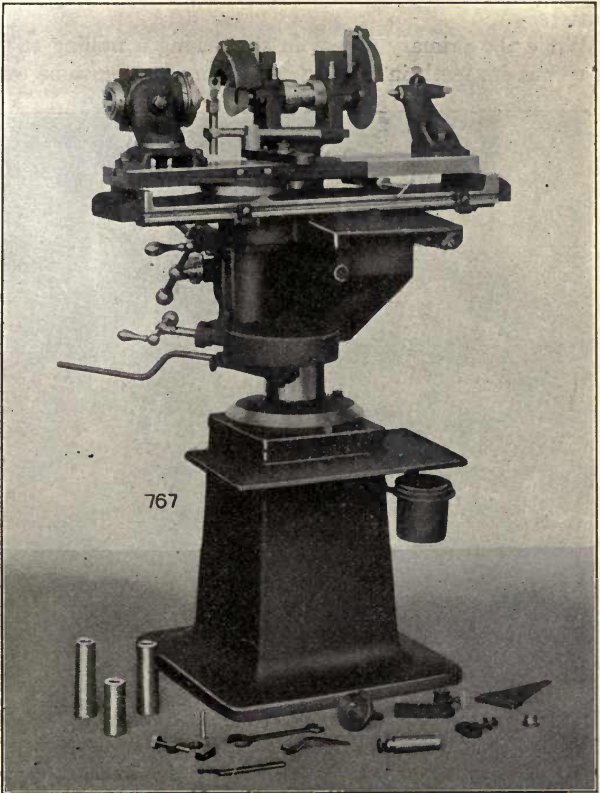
Cincinnati universal grinding machine adapted for tool-room and cutter grinding.
